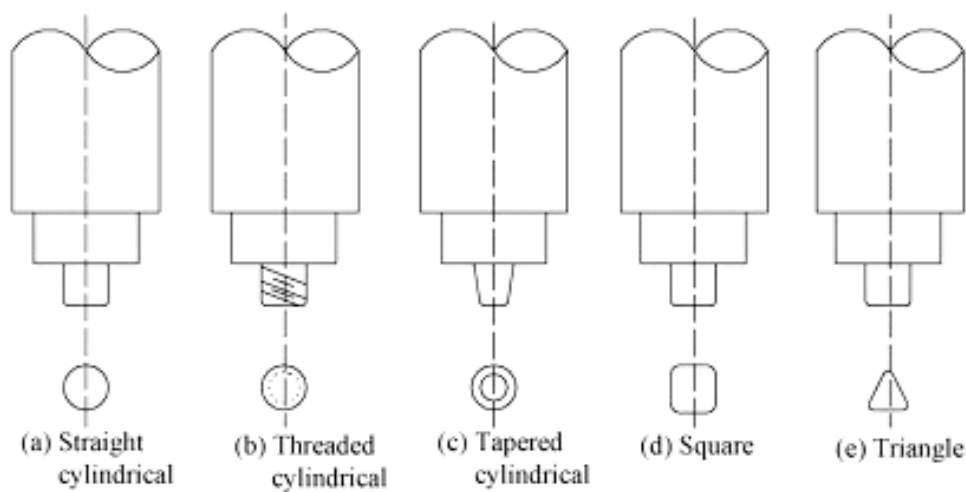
Tool probe geometry in FSP for fabrication of surface composite (a) straight cylindrical (b) threaded cylindrical (c) tapered cylindrical (d) square (e) triangular probe [10].
